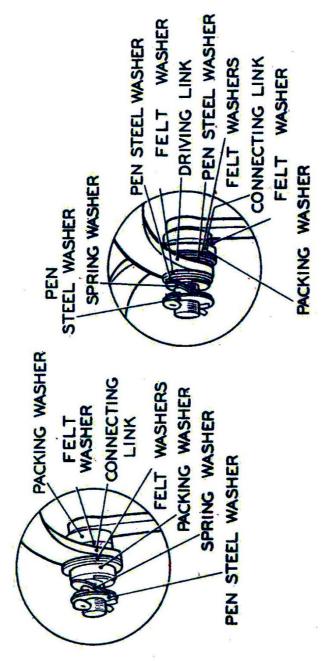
Typical linkage assembly on passenger's side' (left) and driver's side (right)
